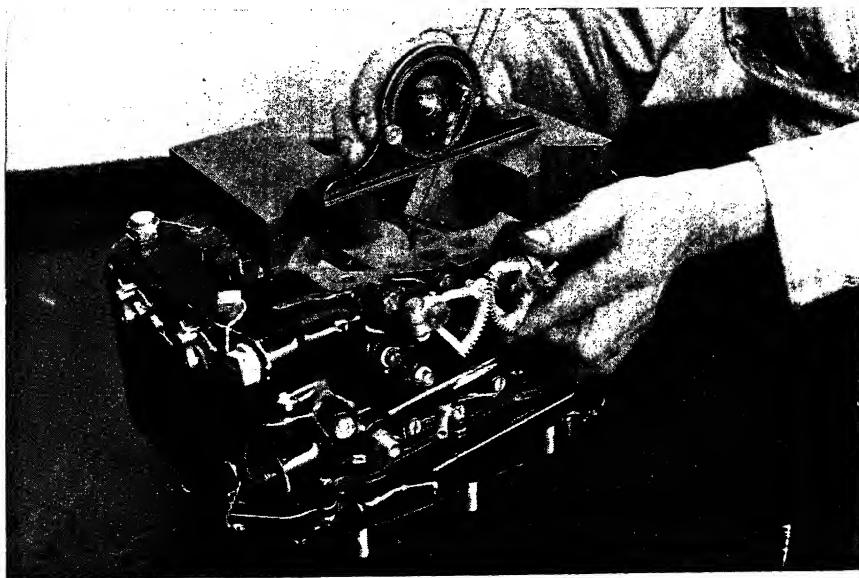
F.—SERVICING A STROMBERG CARBURETTOR (6)
